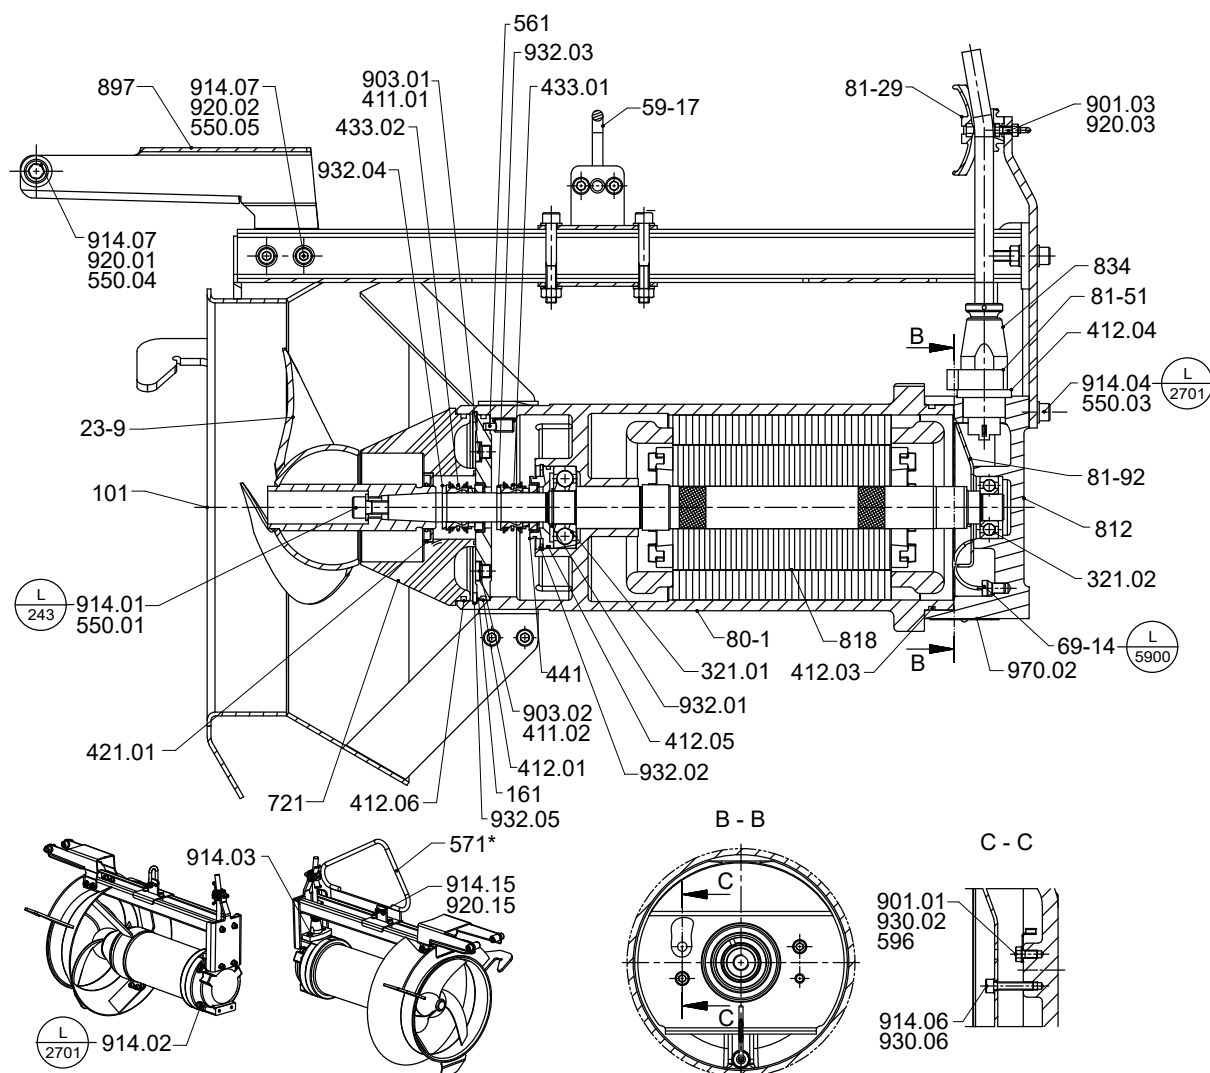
General assembly drawing: a) with shackle b) with bail (optional)
